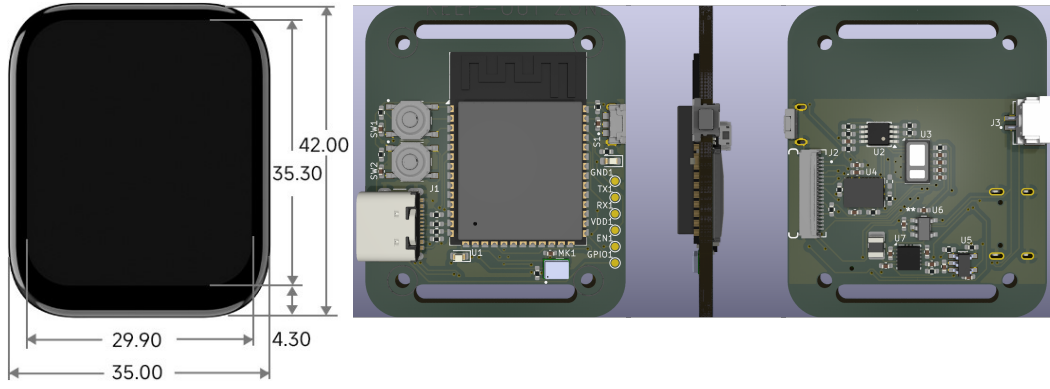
Final smartwatch PCB implementation showing dimensional comparison with the selected 1.83-inch smartwatch display module, front-side PCB layout, edge-view visualization, and rear-side PCB layout. The PCB outline and display mounting-hole arrangement were designed to align with the selected display module, enabling direct mounting of the display above the front-side PCB structure.
